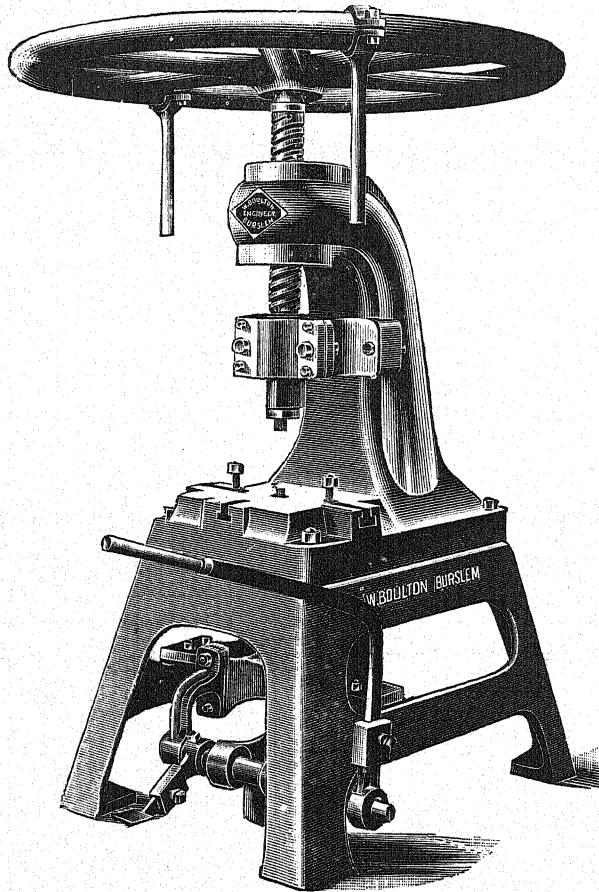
Dust-tile press, horsehead type. (By Messrs. W. Boulton, Ltd., Burslem.)
